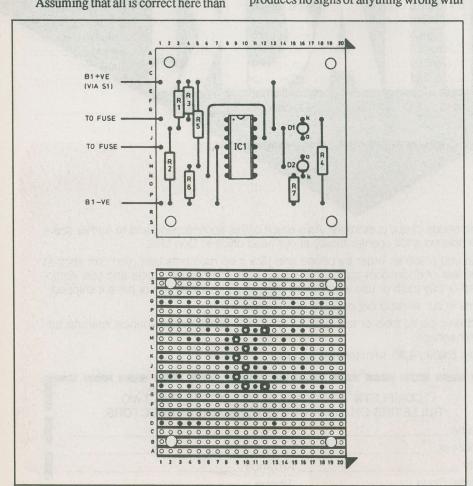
Stripboard components layout and details of the breaks required in the underside copper tracks.
